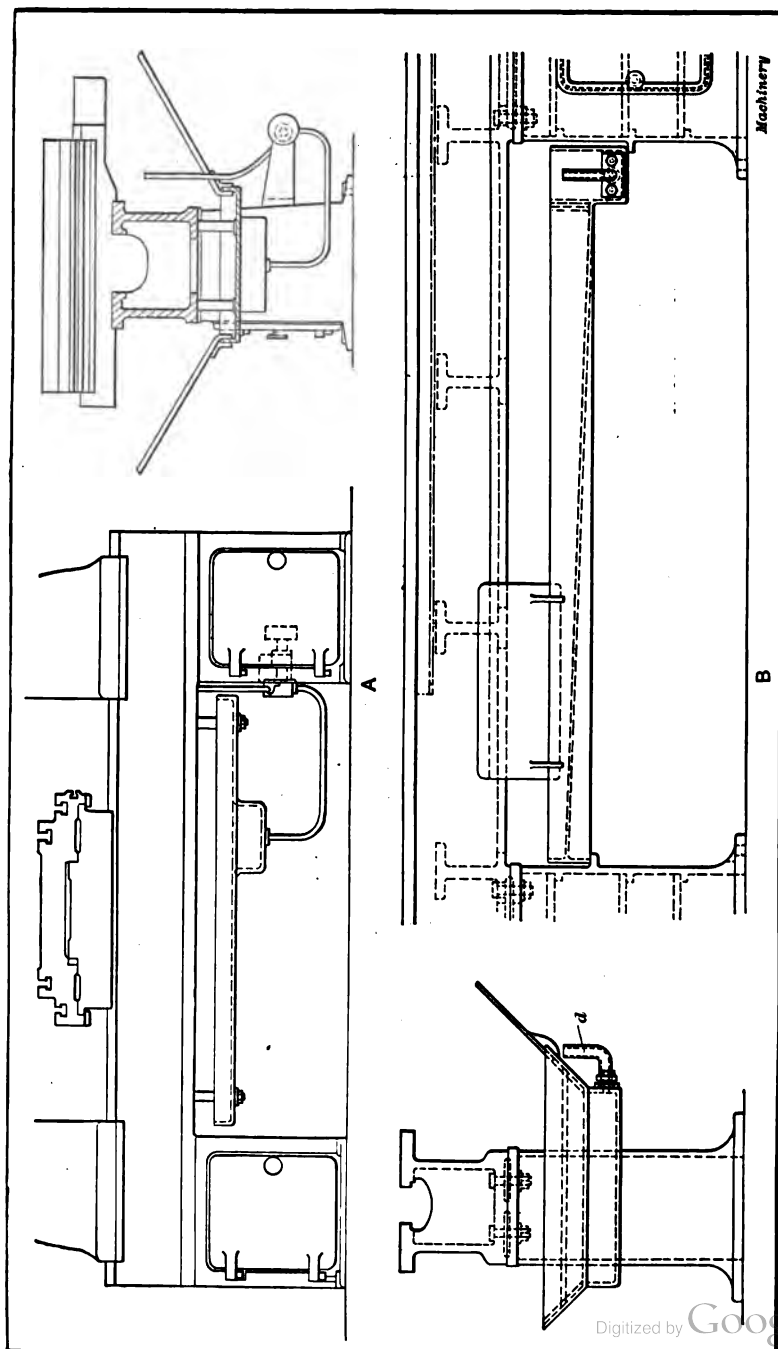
A, Suspended Fan with Splash Guards; B, Fan beneath Lathe Bed, having Splash Guards and Well
